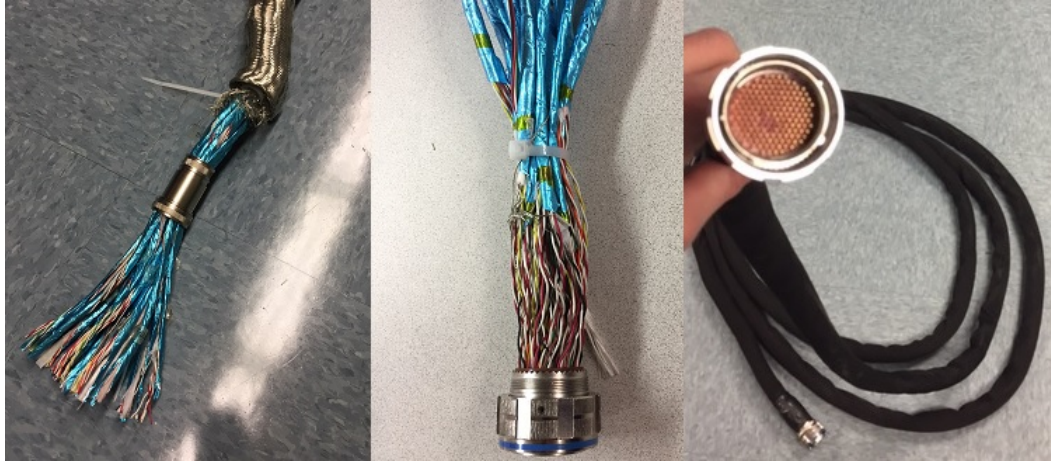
A series of photos showing assembly of the custom 151 pin cable which connects the controller box to the robot. The final product combines 16 smaller cables, 8 corresponding to motor function consisting of three sets of twisted paired wires, and 8 corresponding to encoder signals consisting of 6 sets of twisted paired wires.
